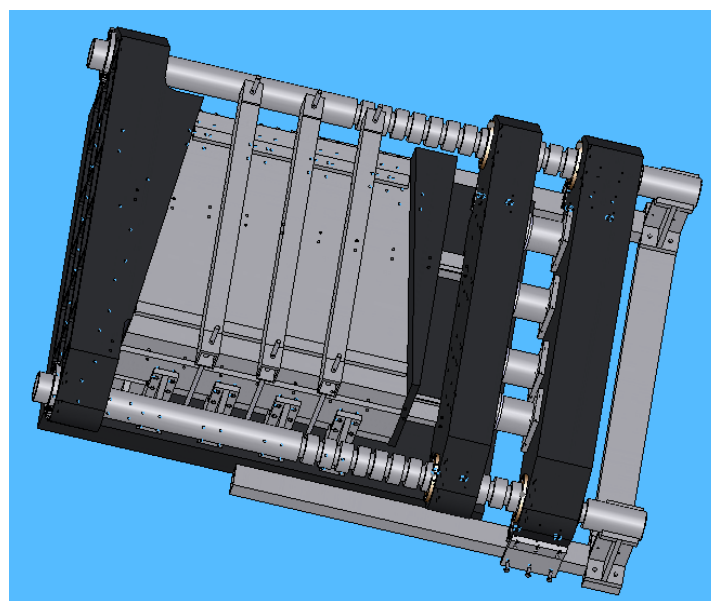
A 300 ton oil pressure machine for stamping and welding one half-yoke of the dipole.
